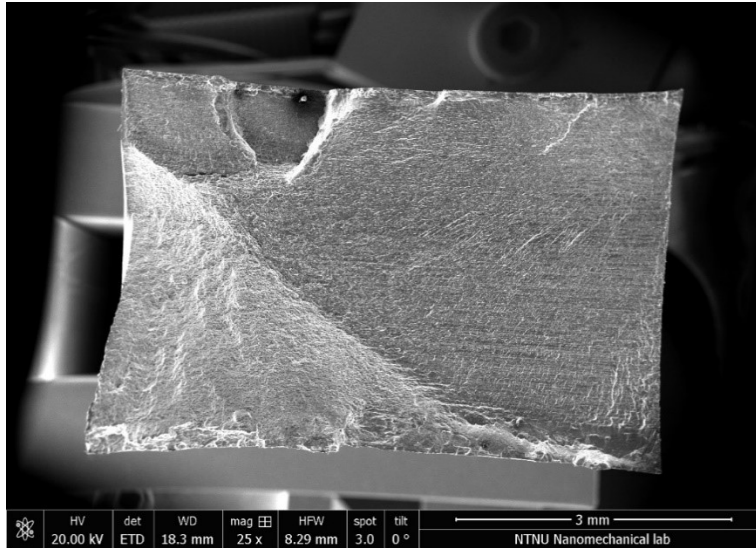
Additional SEM image of the fracture surfaces at low magnification for a selected fatigue test specimen. Specimen code: BMT26. Magnification 25x. Zone: overview.
